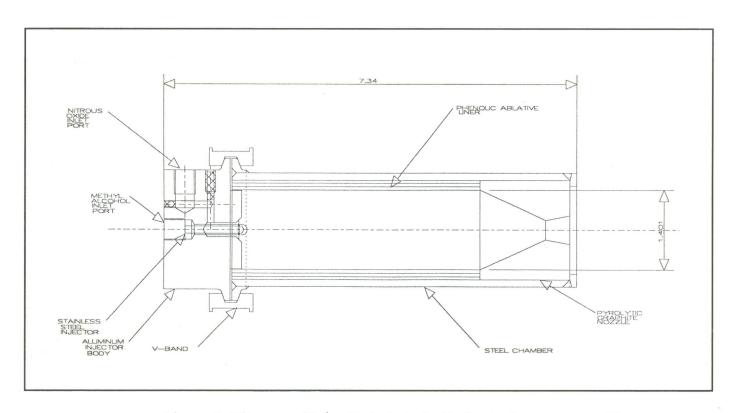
Nitrous oxide/methyl alcohol ablative test motor assembly
